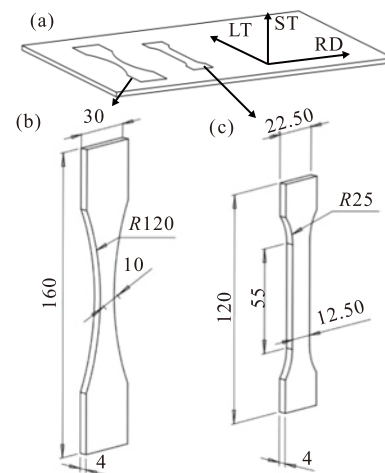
Specimens: (a) the position of the specimens in plate ;(b) HCF specimen; (c) tensile specimen. (unit: mm)
